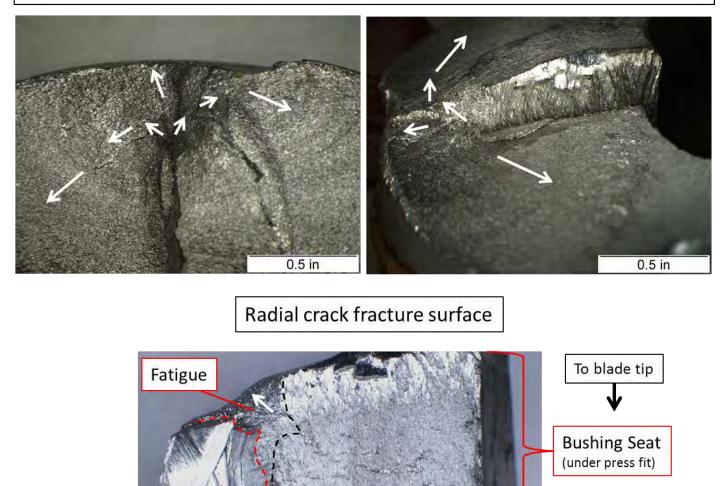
Initiation and propagation of circumferential fatigue crack from intergranular radial crack.
